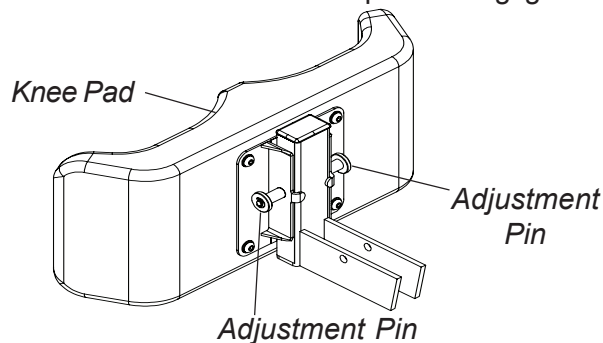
ADJUSTING THE KNEE PAD HEIGHT
